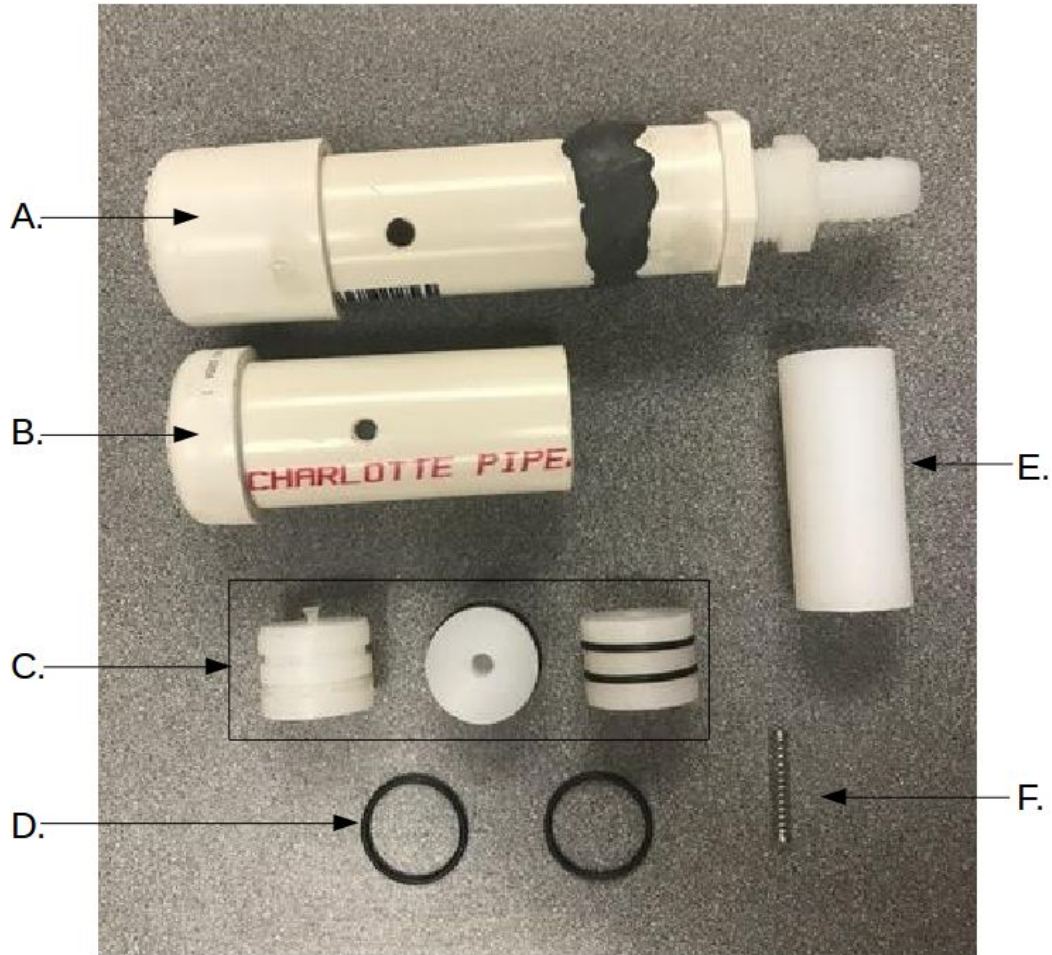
Collection of prototypes and parts used for fabrication. A. Final prototype. B. Tube with spring and valve used for mechanical testing. C. Piston prototypes; these were made with incorrect dimensions but display the basic idea and placement of O-rings. D. O-rings. E. Uncut section of PE dowel used for valve fabrication. F. Spring, similar to the one used in the final prototype (by Emma Alley).
